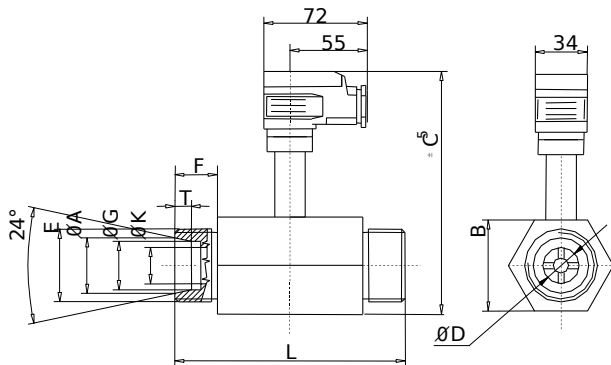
Dimensions at threaded pipe connection. (A=0)
